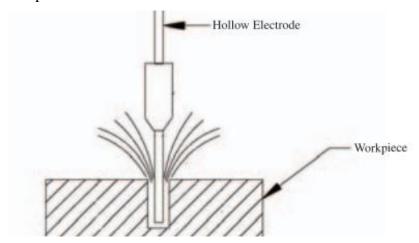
Hole Popper used to create small holes on the workpiece.
